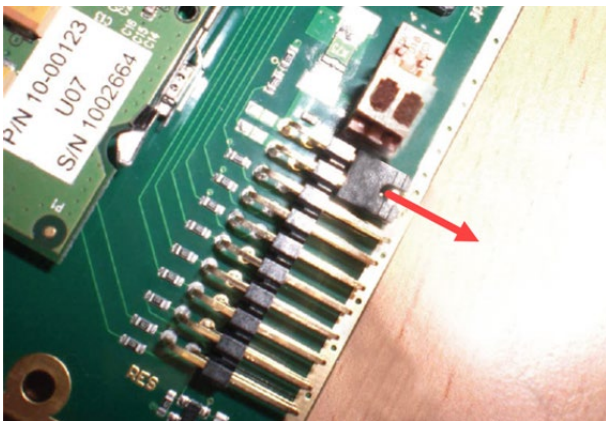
Removing the jumper for installing a USB 2.0 stand-alone module in a slide-in chassis
